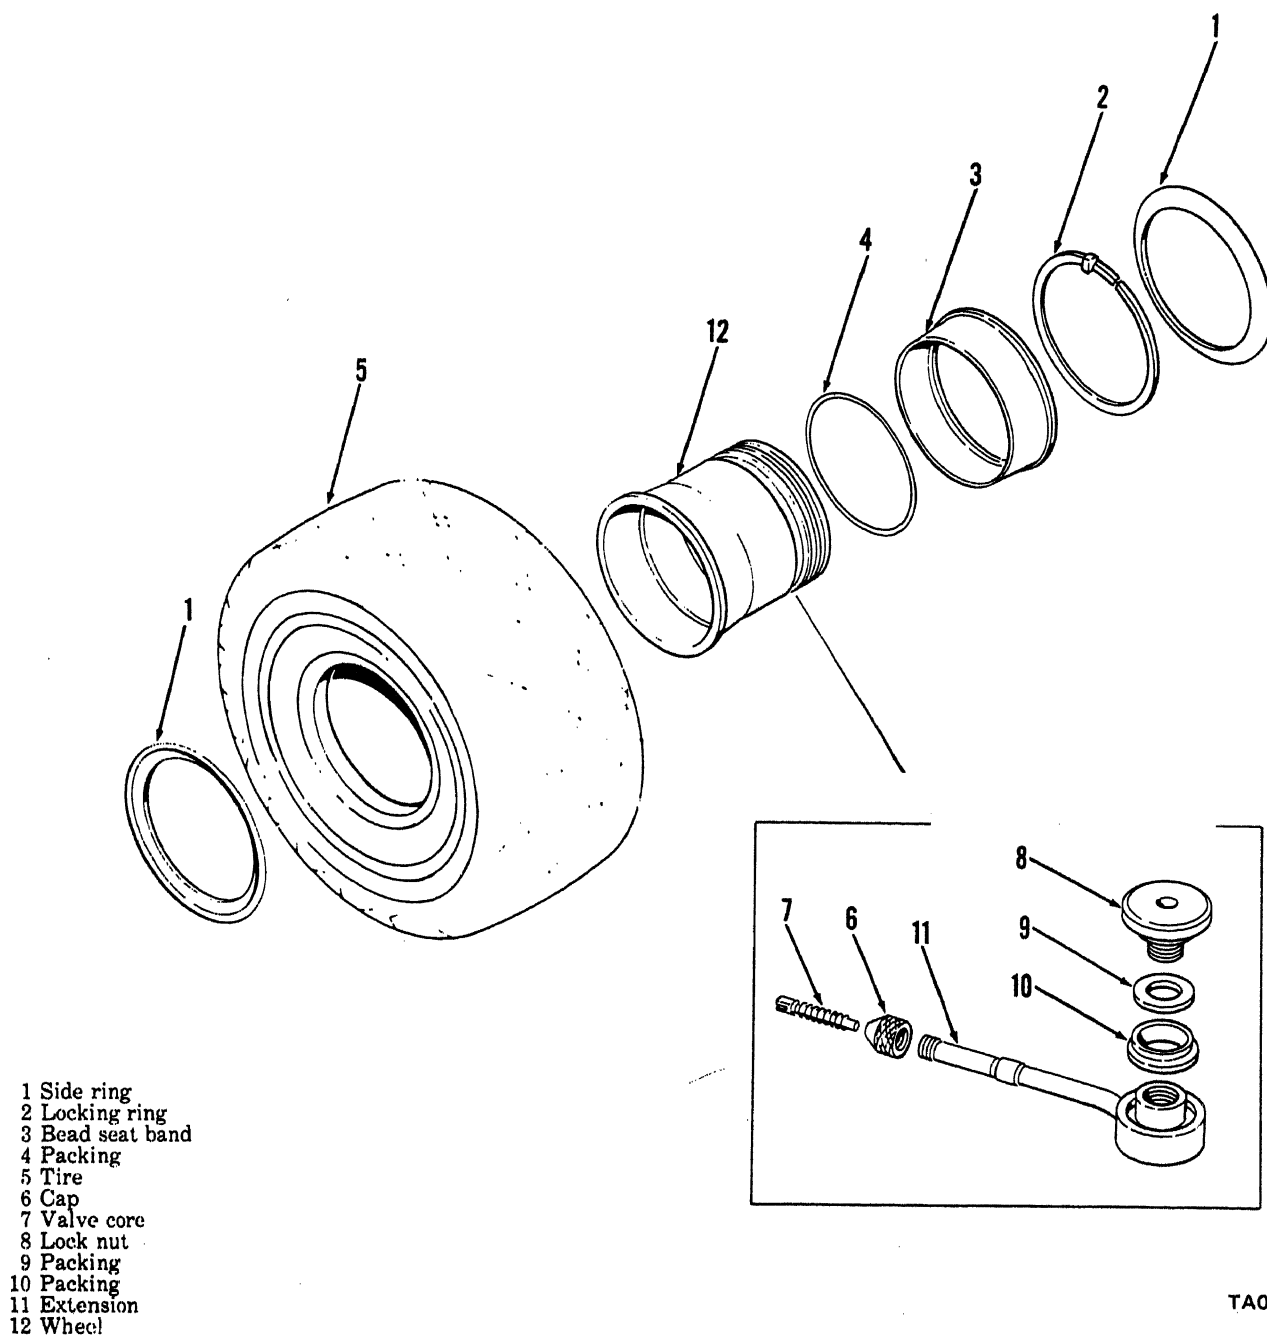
Carrier wheel and tire assembly—exploded view.
